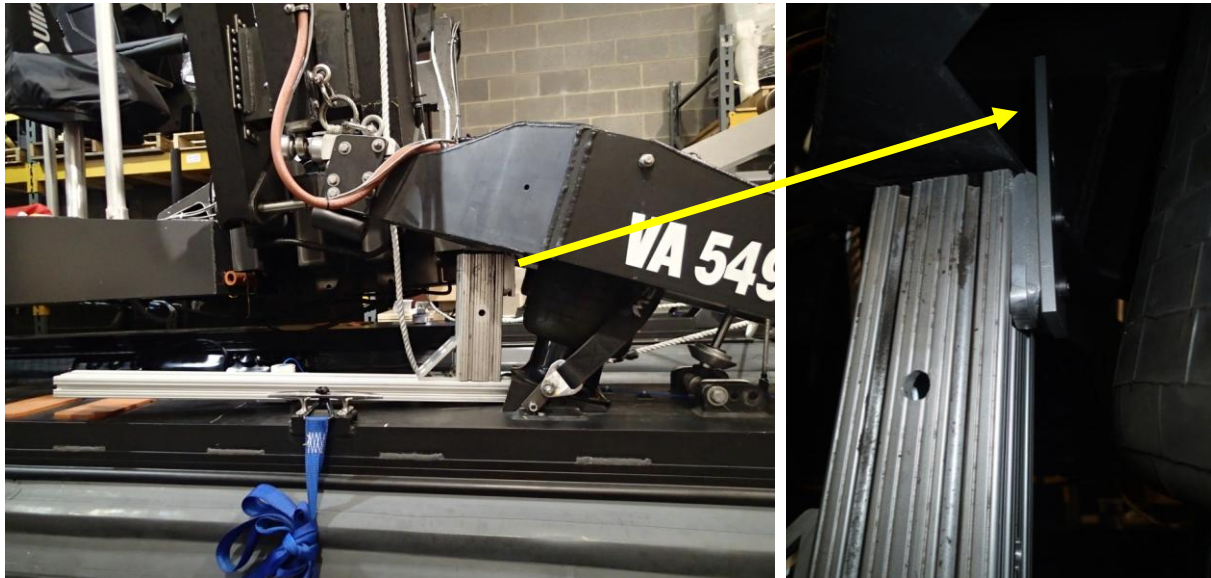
Tool props suspension up (left) and flange keeps tool from rolling (right)
